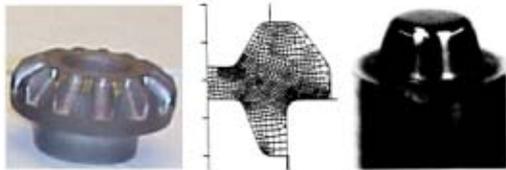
Bevel gear, FE model and the punch used to forge the gear [13].
